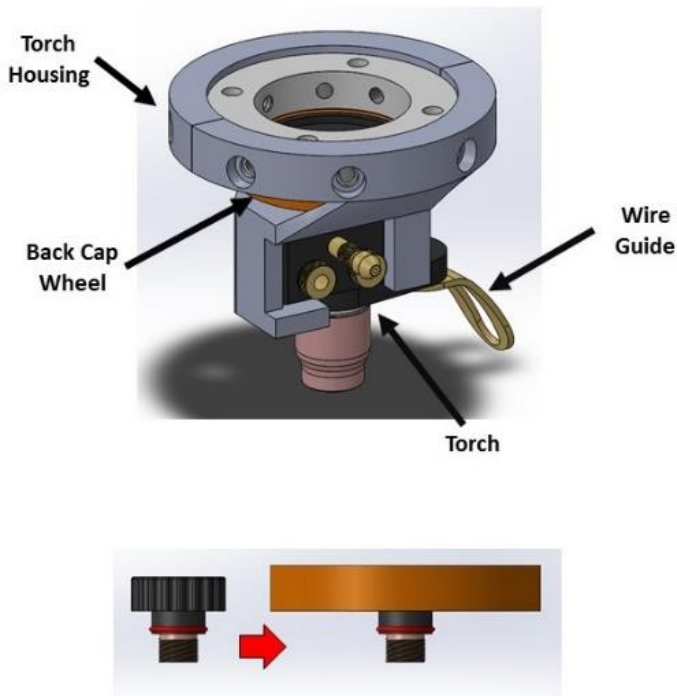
CAD model of the prototype torch end-effector (top) and a CAD model of the wheel attachment on the back cap (bottom).
